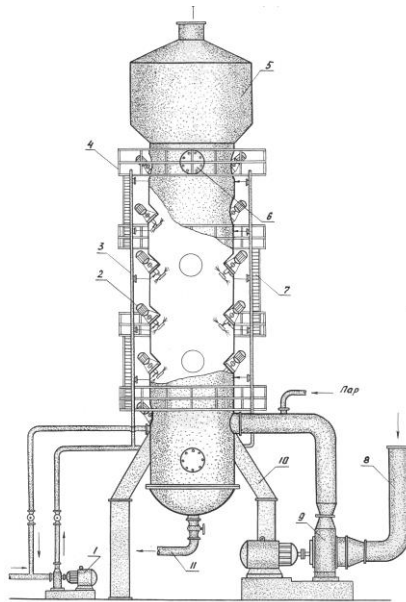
General view of the waste gas treatment plant 1 - pumping station; 2 - electric motor; 3 - solution supply manifold; 4 - platform; 5 - case; 6 - hatch; 7 - stairs; 8 - inlet pipe; 9-fan; 10 - paws; 11 - drain fitting.
